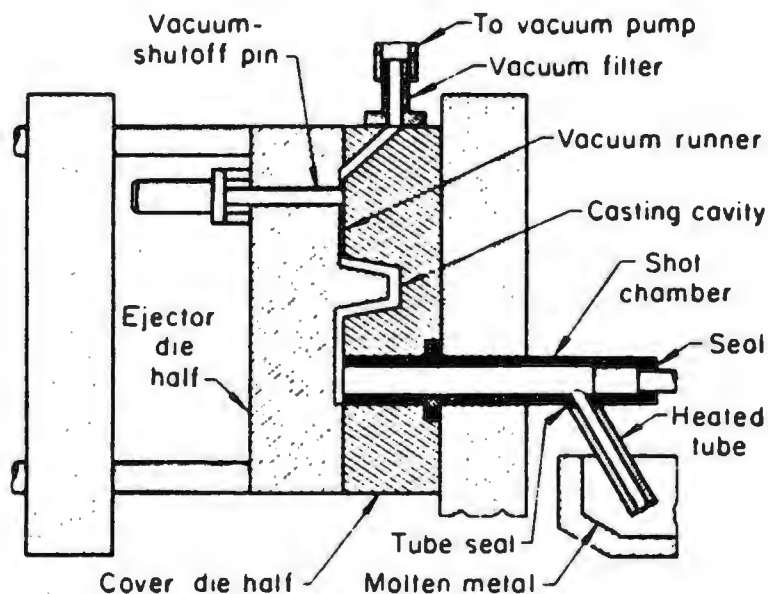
Vacuum-Feed System for Supplying Molten Metal to the Shot Chamber of a Cold-Chamber Die Casting Machine (Reprinted from [12])
